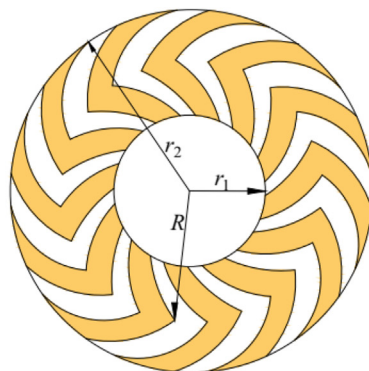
Geometry and nomenclature of the herringbone-grooved thrust bearing.
